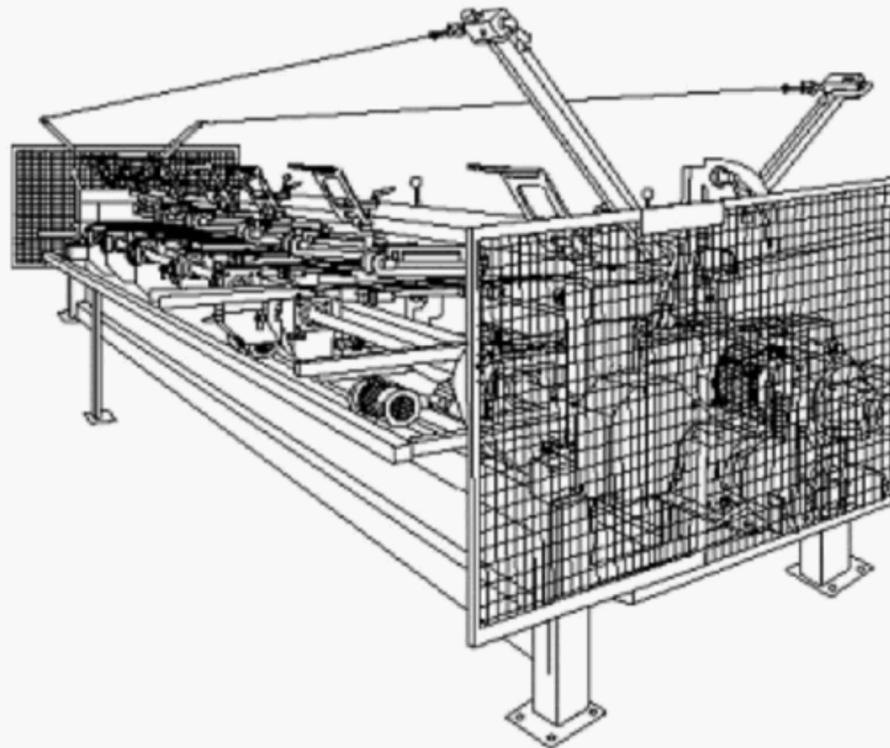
Example of multi-blade cross-cut sawing machine with integrated feed of the work-piece and manual loading and/or unloading (guards are partially not represented for clarity)
